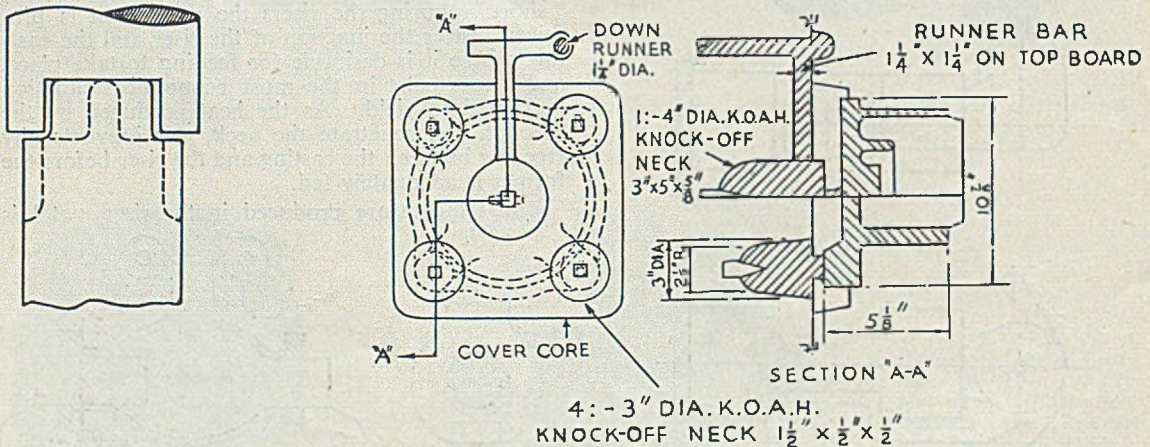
(LEFT).—"Wobbler"-end of a Roll Casting showing the Arrangement of "Elephant Ears" for providing Remote Heat. FIG. 29 (RIGHT).—Methods-department Layout Sheet for the Hoffman Axle-box Cover Casting.
